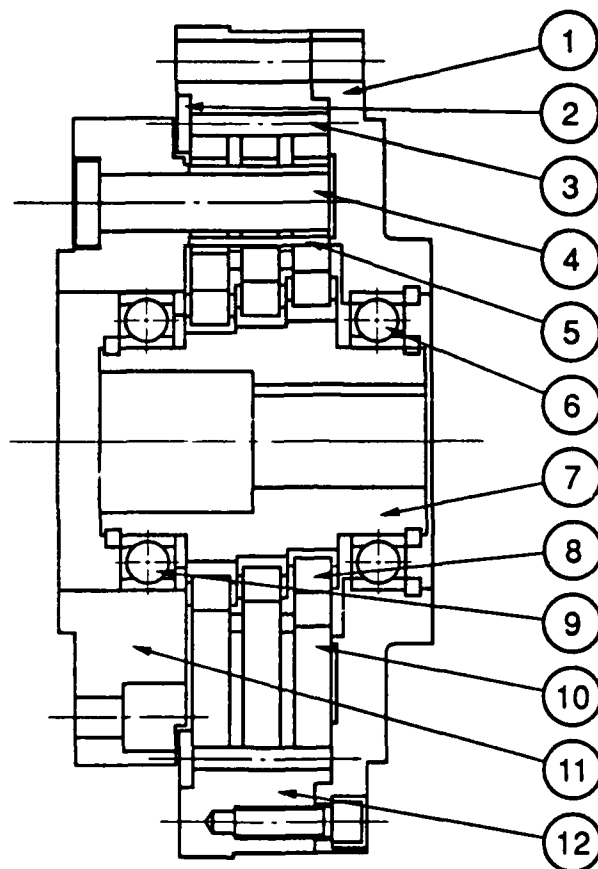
Cross-sectional view of Servo-Match Cycloidal Reducer, showing (1) input housing flange, (2) roller bearing retaining ring, (3) roller pins, (4) output cantilevers, (5) load transfer cylinder, (6) input-shaft bearing, (7) input cam-shaft, (8) disk roller bearings, (9) cam-shaft bearing, (10) three epitrochoid disks, (11) cantilever output flange, (12) roller-pin housing.
